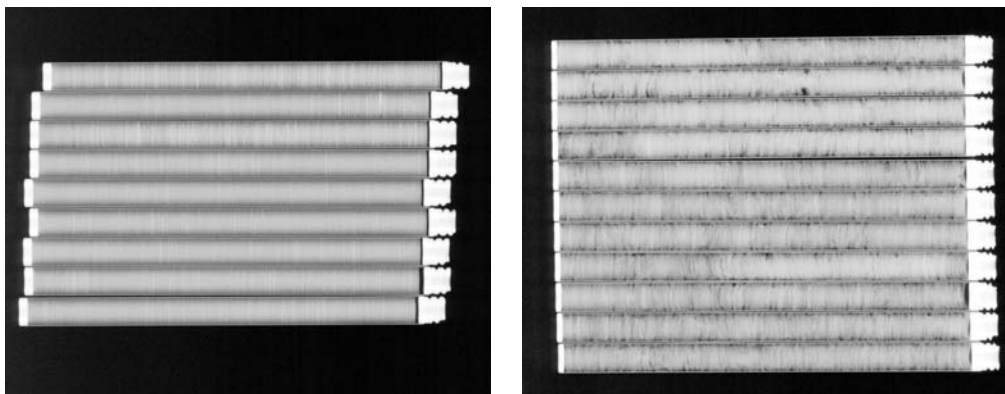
X-ray photographs of displacers stacked with the old stacking machine (left) and new stacking machine (right)
